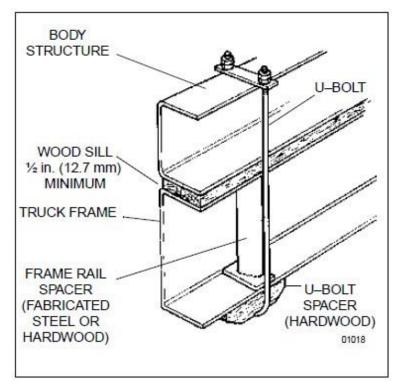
Acceptable U-Bolt Mounting with Wood and Fabricated Spacers
